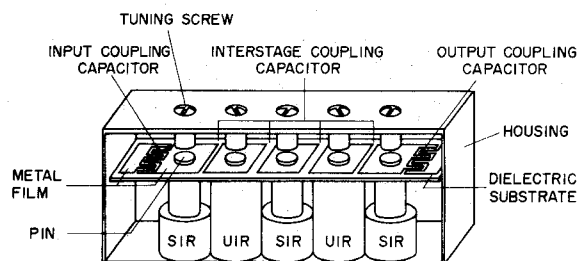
Longitudinal cutaway of the fabricated bandpass filter.
